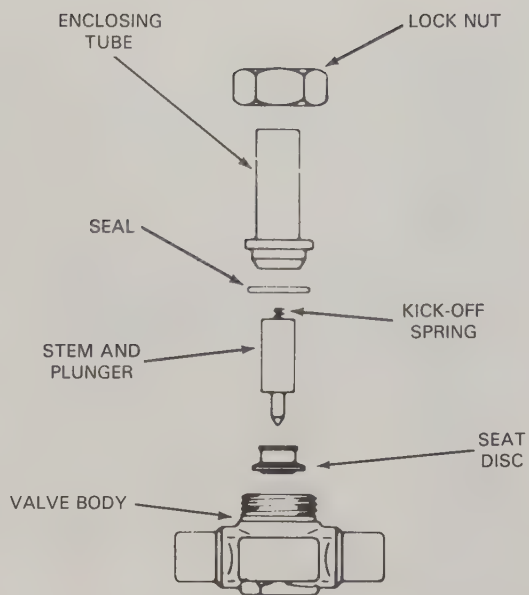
An exploded view of the solenoid valve assembly. The magnetic coil, which surrounds the enclosing tube, has been removed for clarity. (Sporlan Valve Co.)
